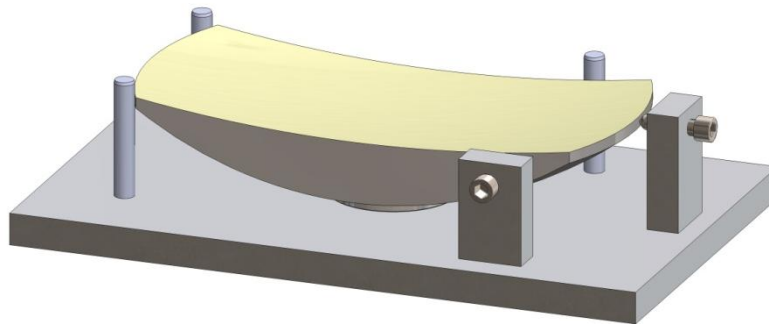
Fully assembled collimator mirror and puck alignment fixture.
